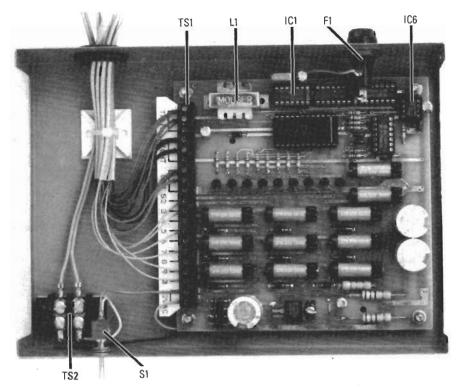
MOUNT THE PC BOARD, fuse, and power switch as shown here. Run the interconnecting wires through a hole in the rear of the box; insulate the hole with a large grommet.
